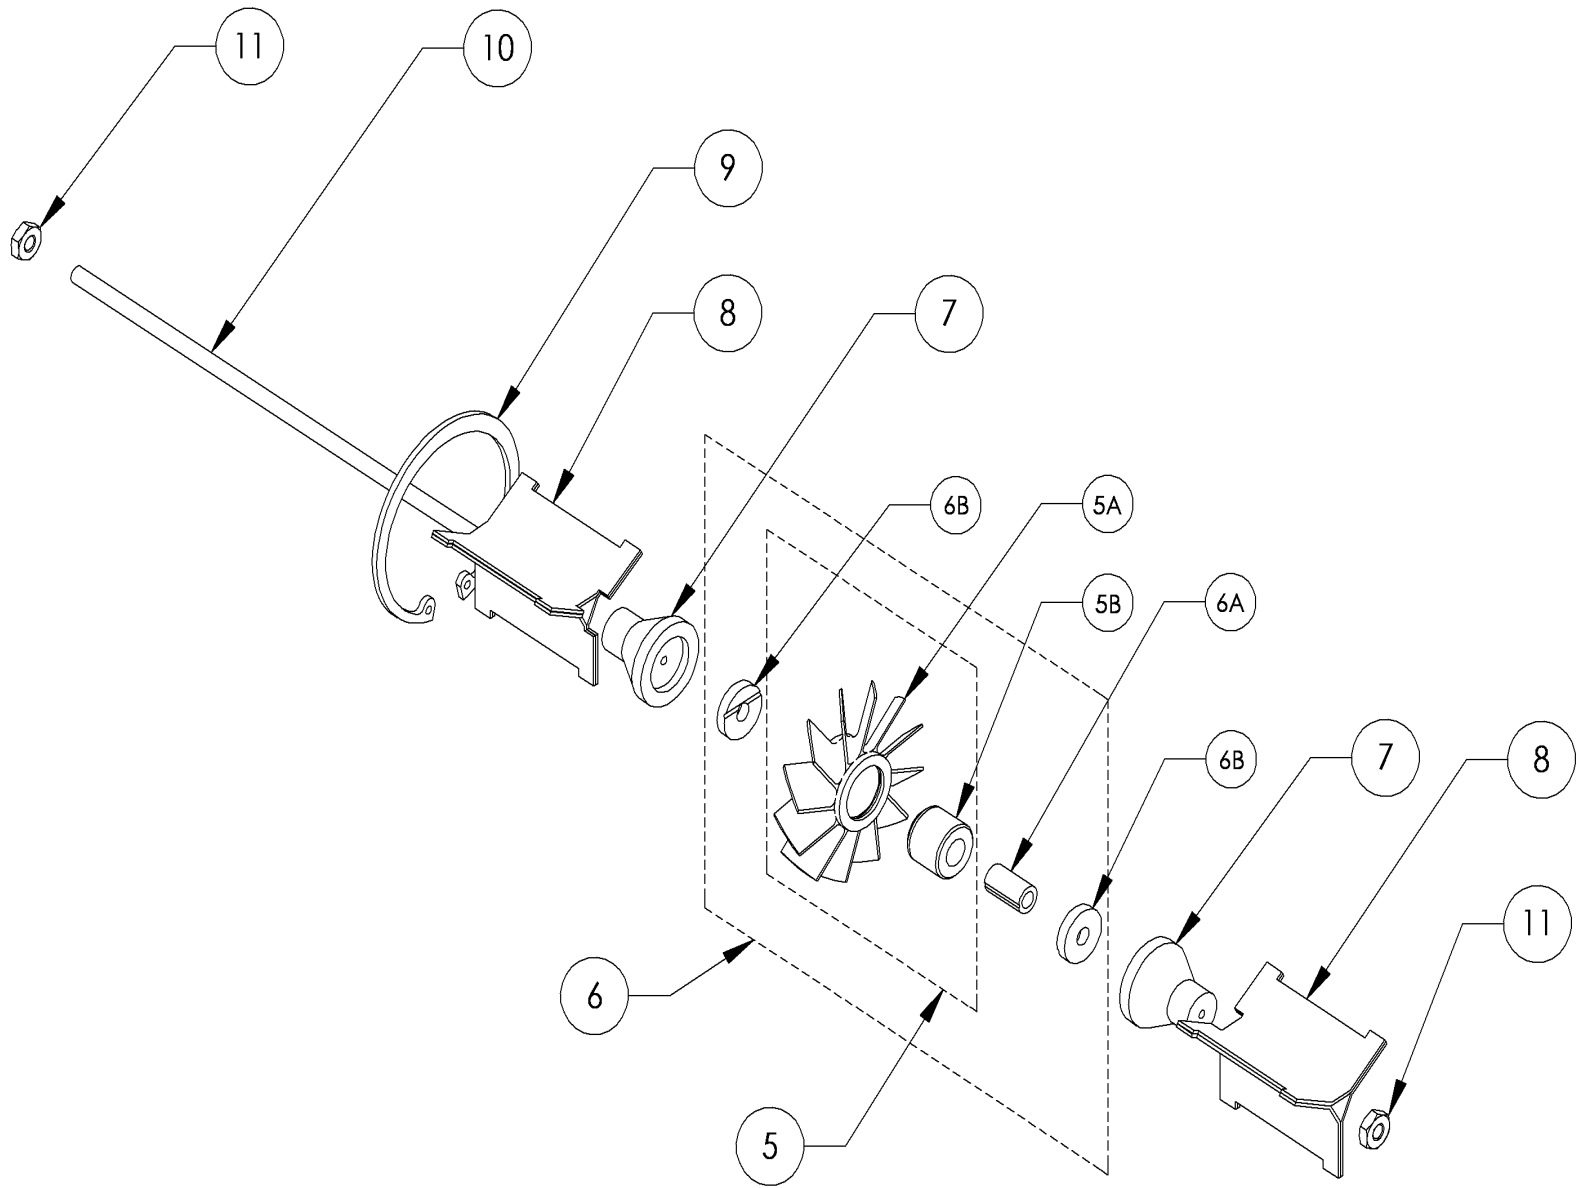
HS-40 Journal Bearing Internal Assembly (Bearing Code D)
